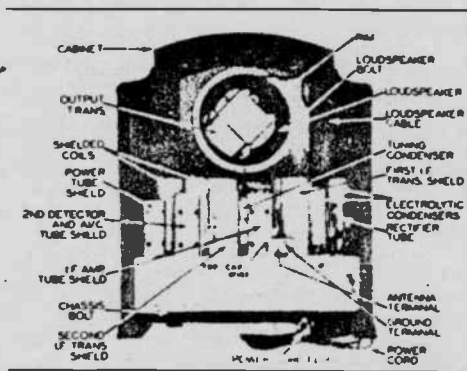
An inspection of the rear of the set will show how the chassis and loudspeaker can be removed for a thorough overhaul.
